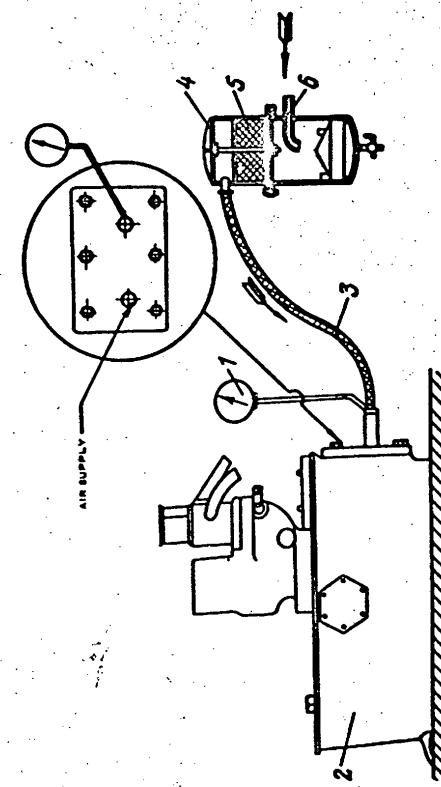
TESTING SUPERCHARGER WITH COMPRESSED AIR
